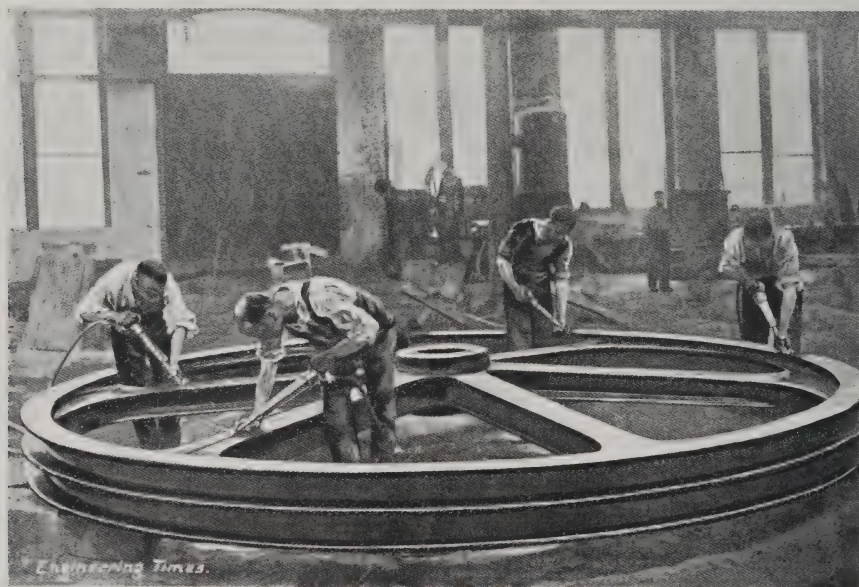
THE PNEUMATIC HAMMER IN THE FOUNDRY: CHIPPING A LARGE CASTING.
